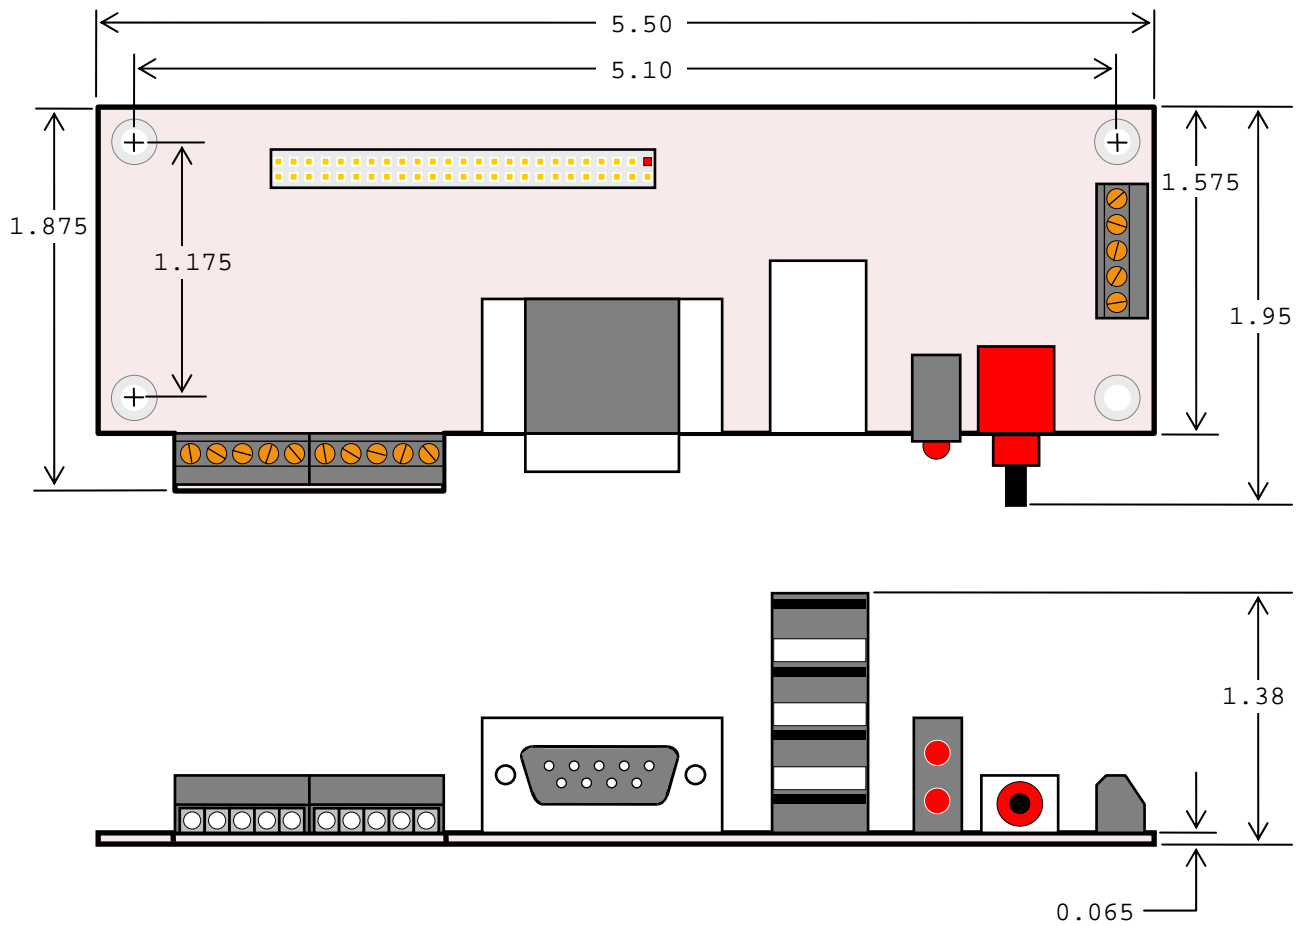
EPM-5 Dimensions and Mounting Holes
